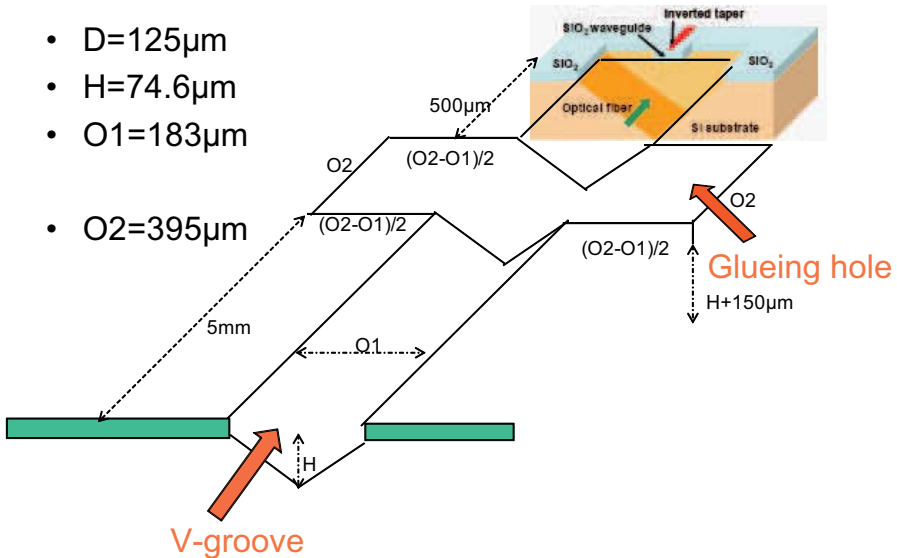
Schematic showing the proposed V-groove dimensions for the fabrication.
